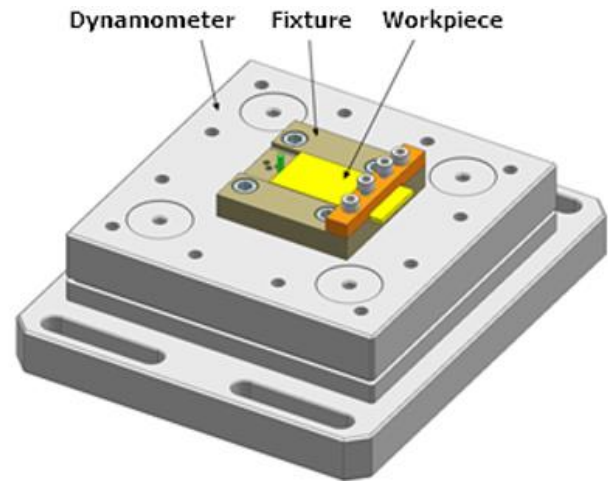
The proposed fixture with a workpiece placed on the KISTLER 9255b dynamometer.
